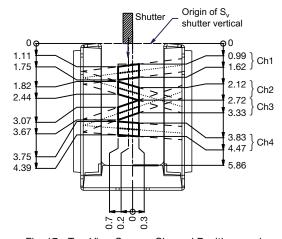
Top View Sensor, Channel Positions and Origin of Vertical Shutter, tolerances ± 0.2 mm
